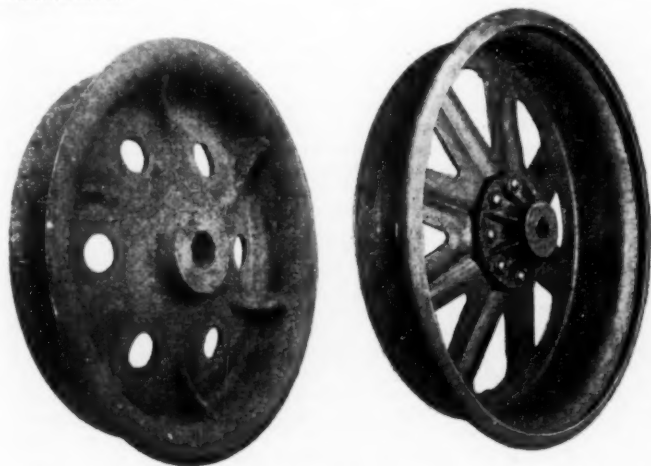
CAST-IRON AND PRESSED-STEEL INDUSTRIAL CAR WHEELS
